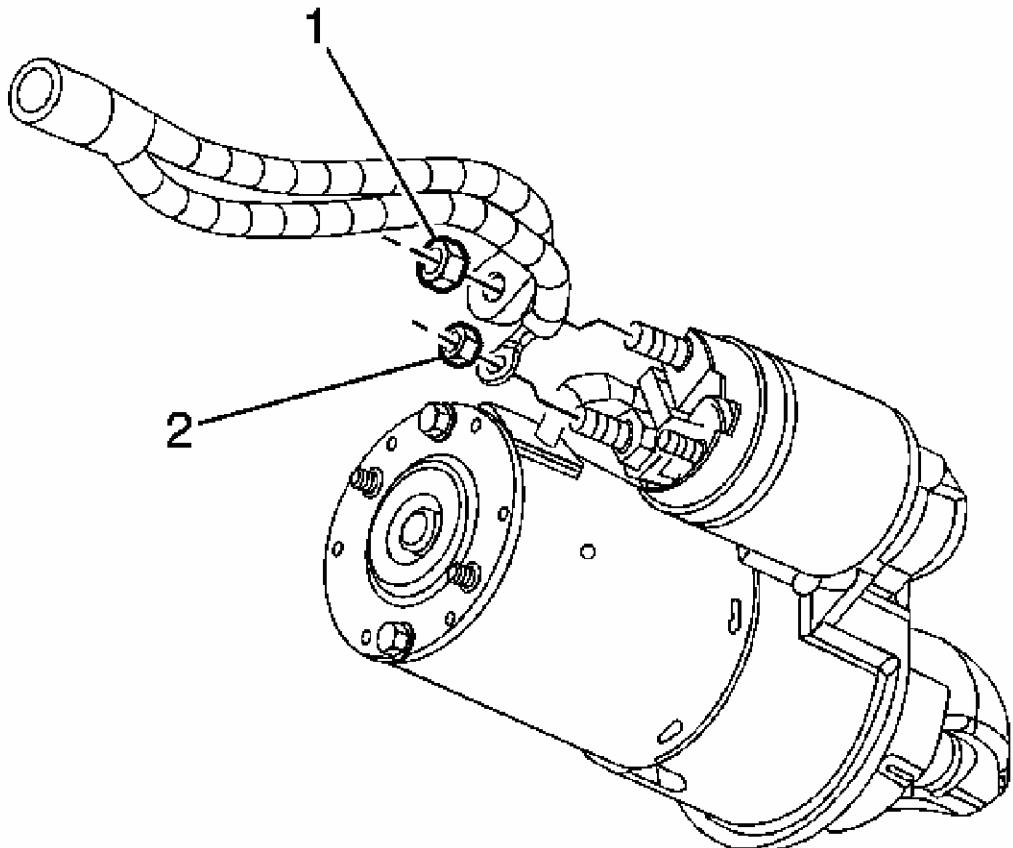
Identifying "BAT" & "S" Terminals On Starter
